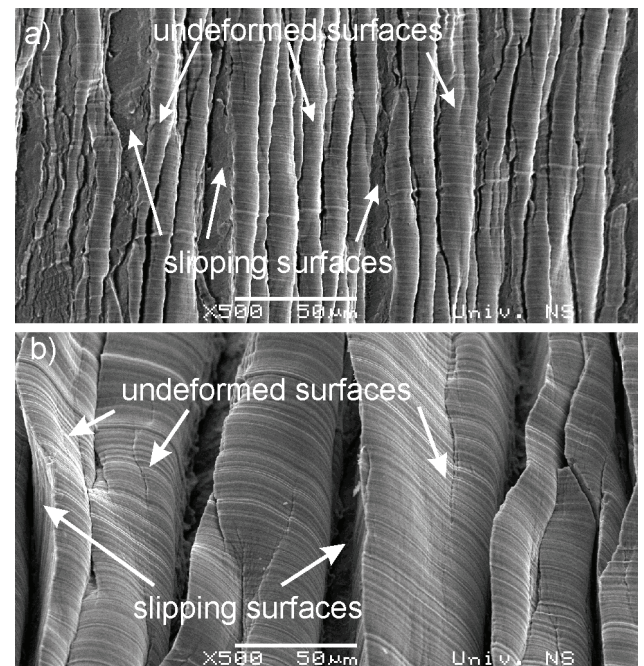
Chip cross section formed at the cutting speed of 180 m/min, feed rate 0,2 mm/rev, depth of cut 1,5 mm: a) new tool insert, b) worn tool insert
